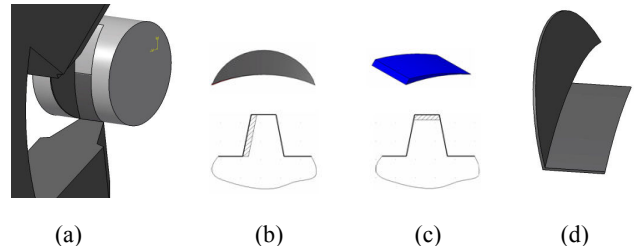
Schematics of (a) whole cutting part (b) side cutting part (c) front cutting part (d) undeformed chip
